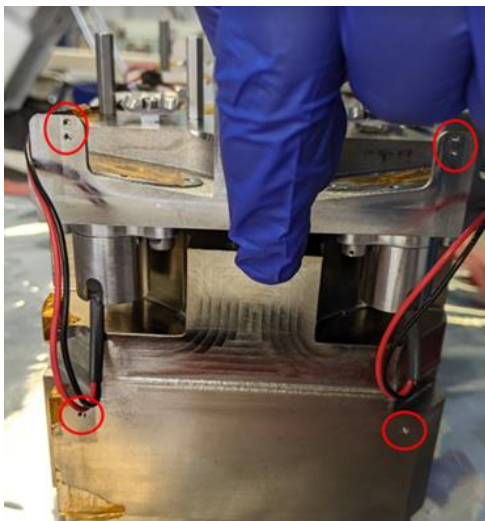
The Tank Manifold Mounting Process with the GSE Fixture
